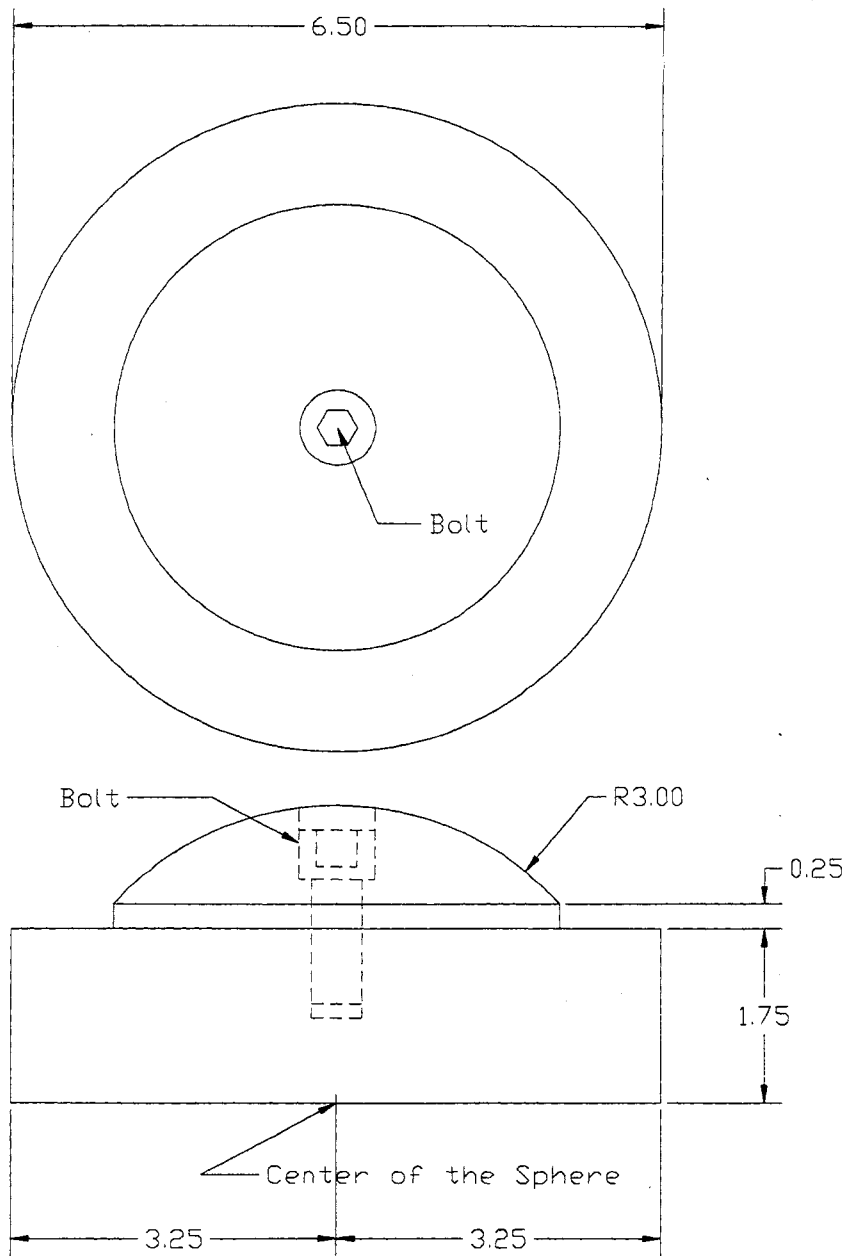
Schematic sketch of the testing machine spherical bearing block.
